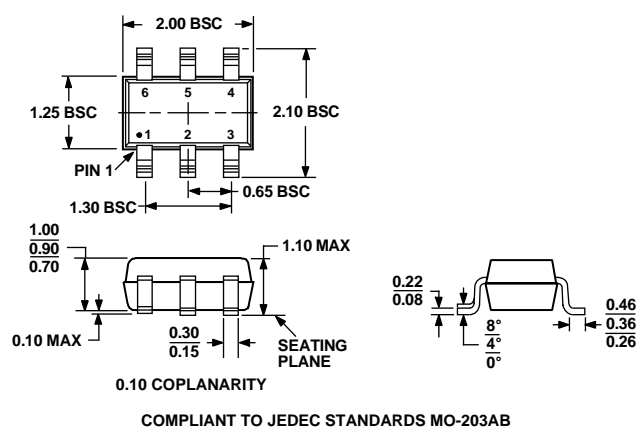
6-Lead Plastic Surface Mount Package [SC70]
